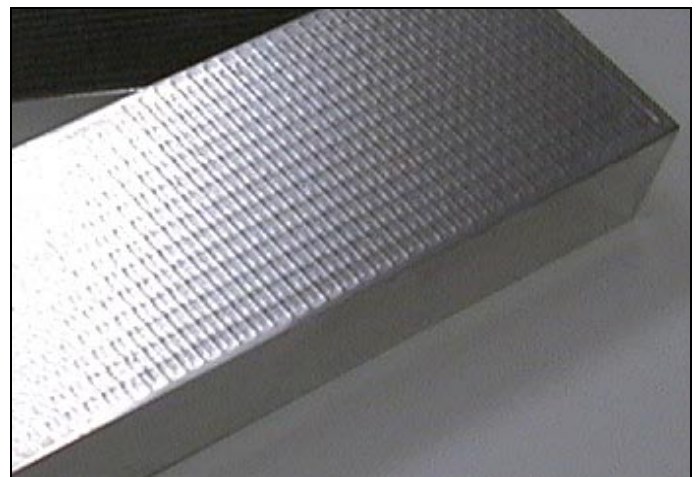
Laser peening generates extremely deep compressive residual stress in alloy 22 weldment.
